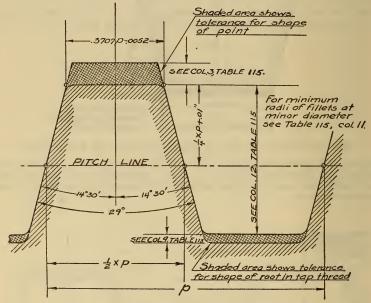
Shape for teeth of tap or internal thread chasing tool, Acme threads
